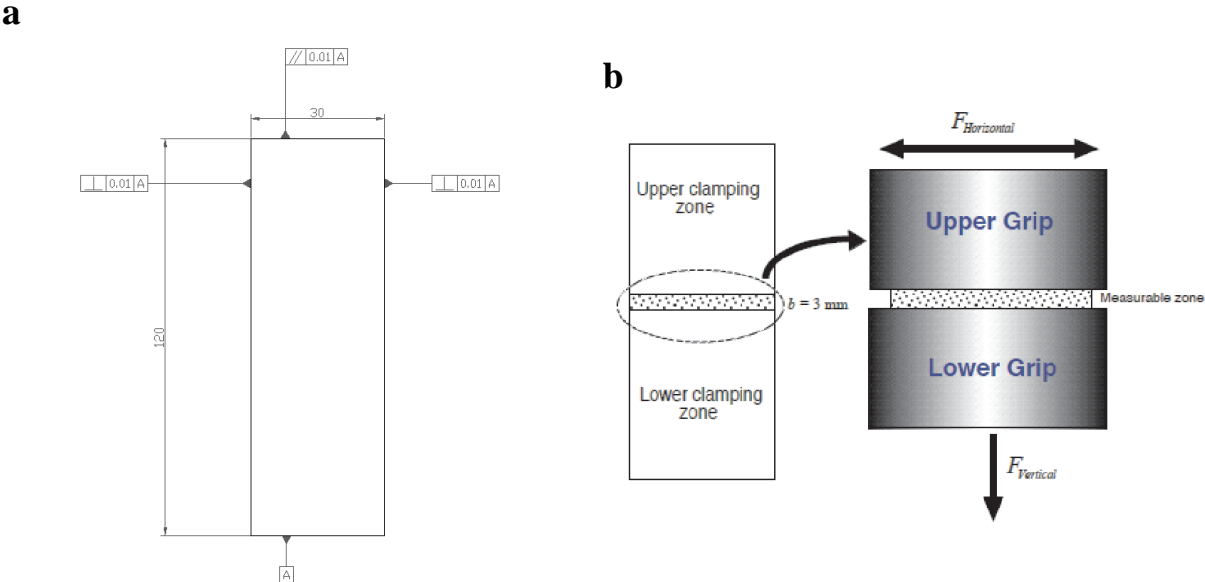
(a) Geometry and dimensions (in mm) of the specimens used for the first plane strain tests, (b) configuration of a specimen inside the grips
